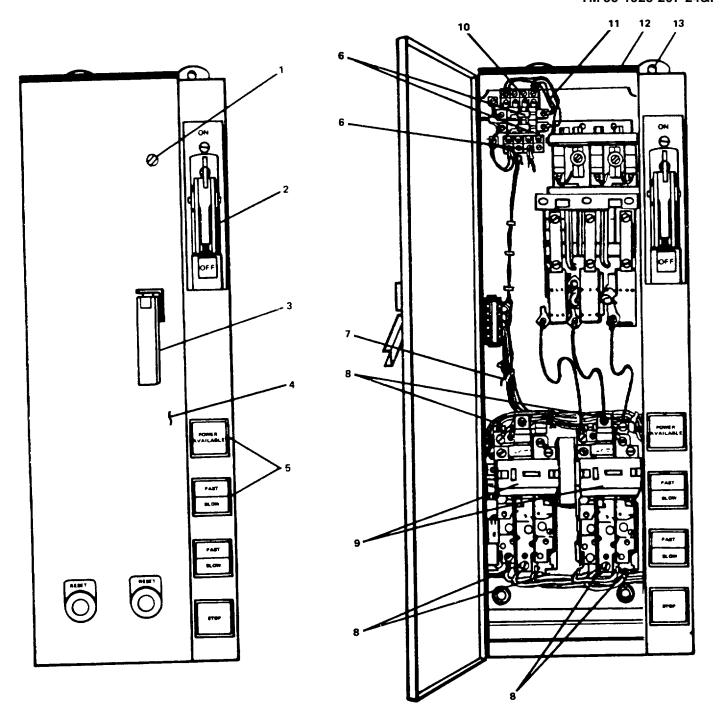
Motor Controller (A 710BQ 7/A 710CQ7).
